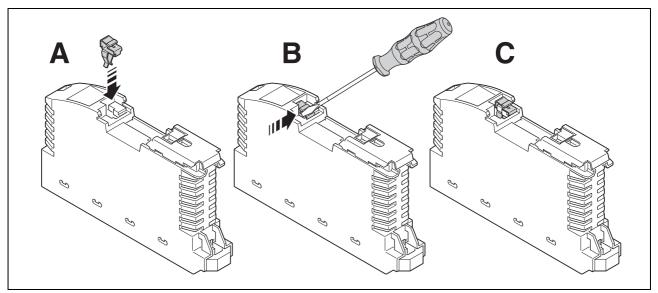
Mounting the FE contact (ME BUS FE CONTACT, 2278076)
